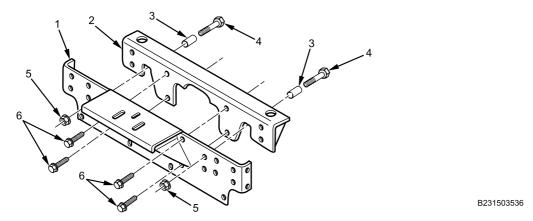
Radiator Support Crossmember and Radiator Support Assembly.
